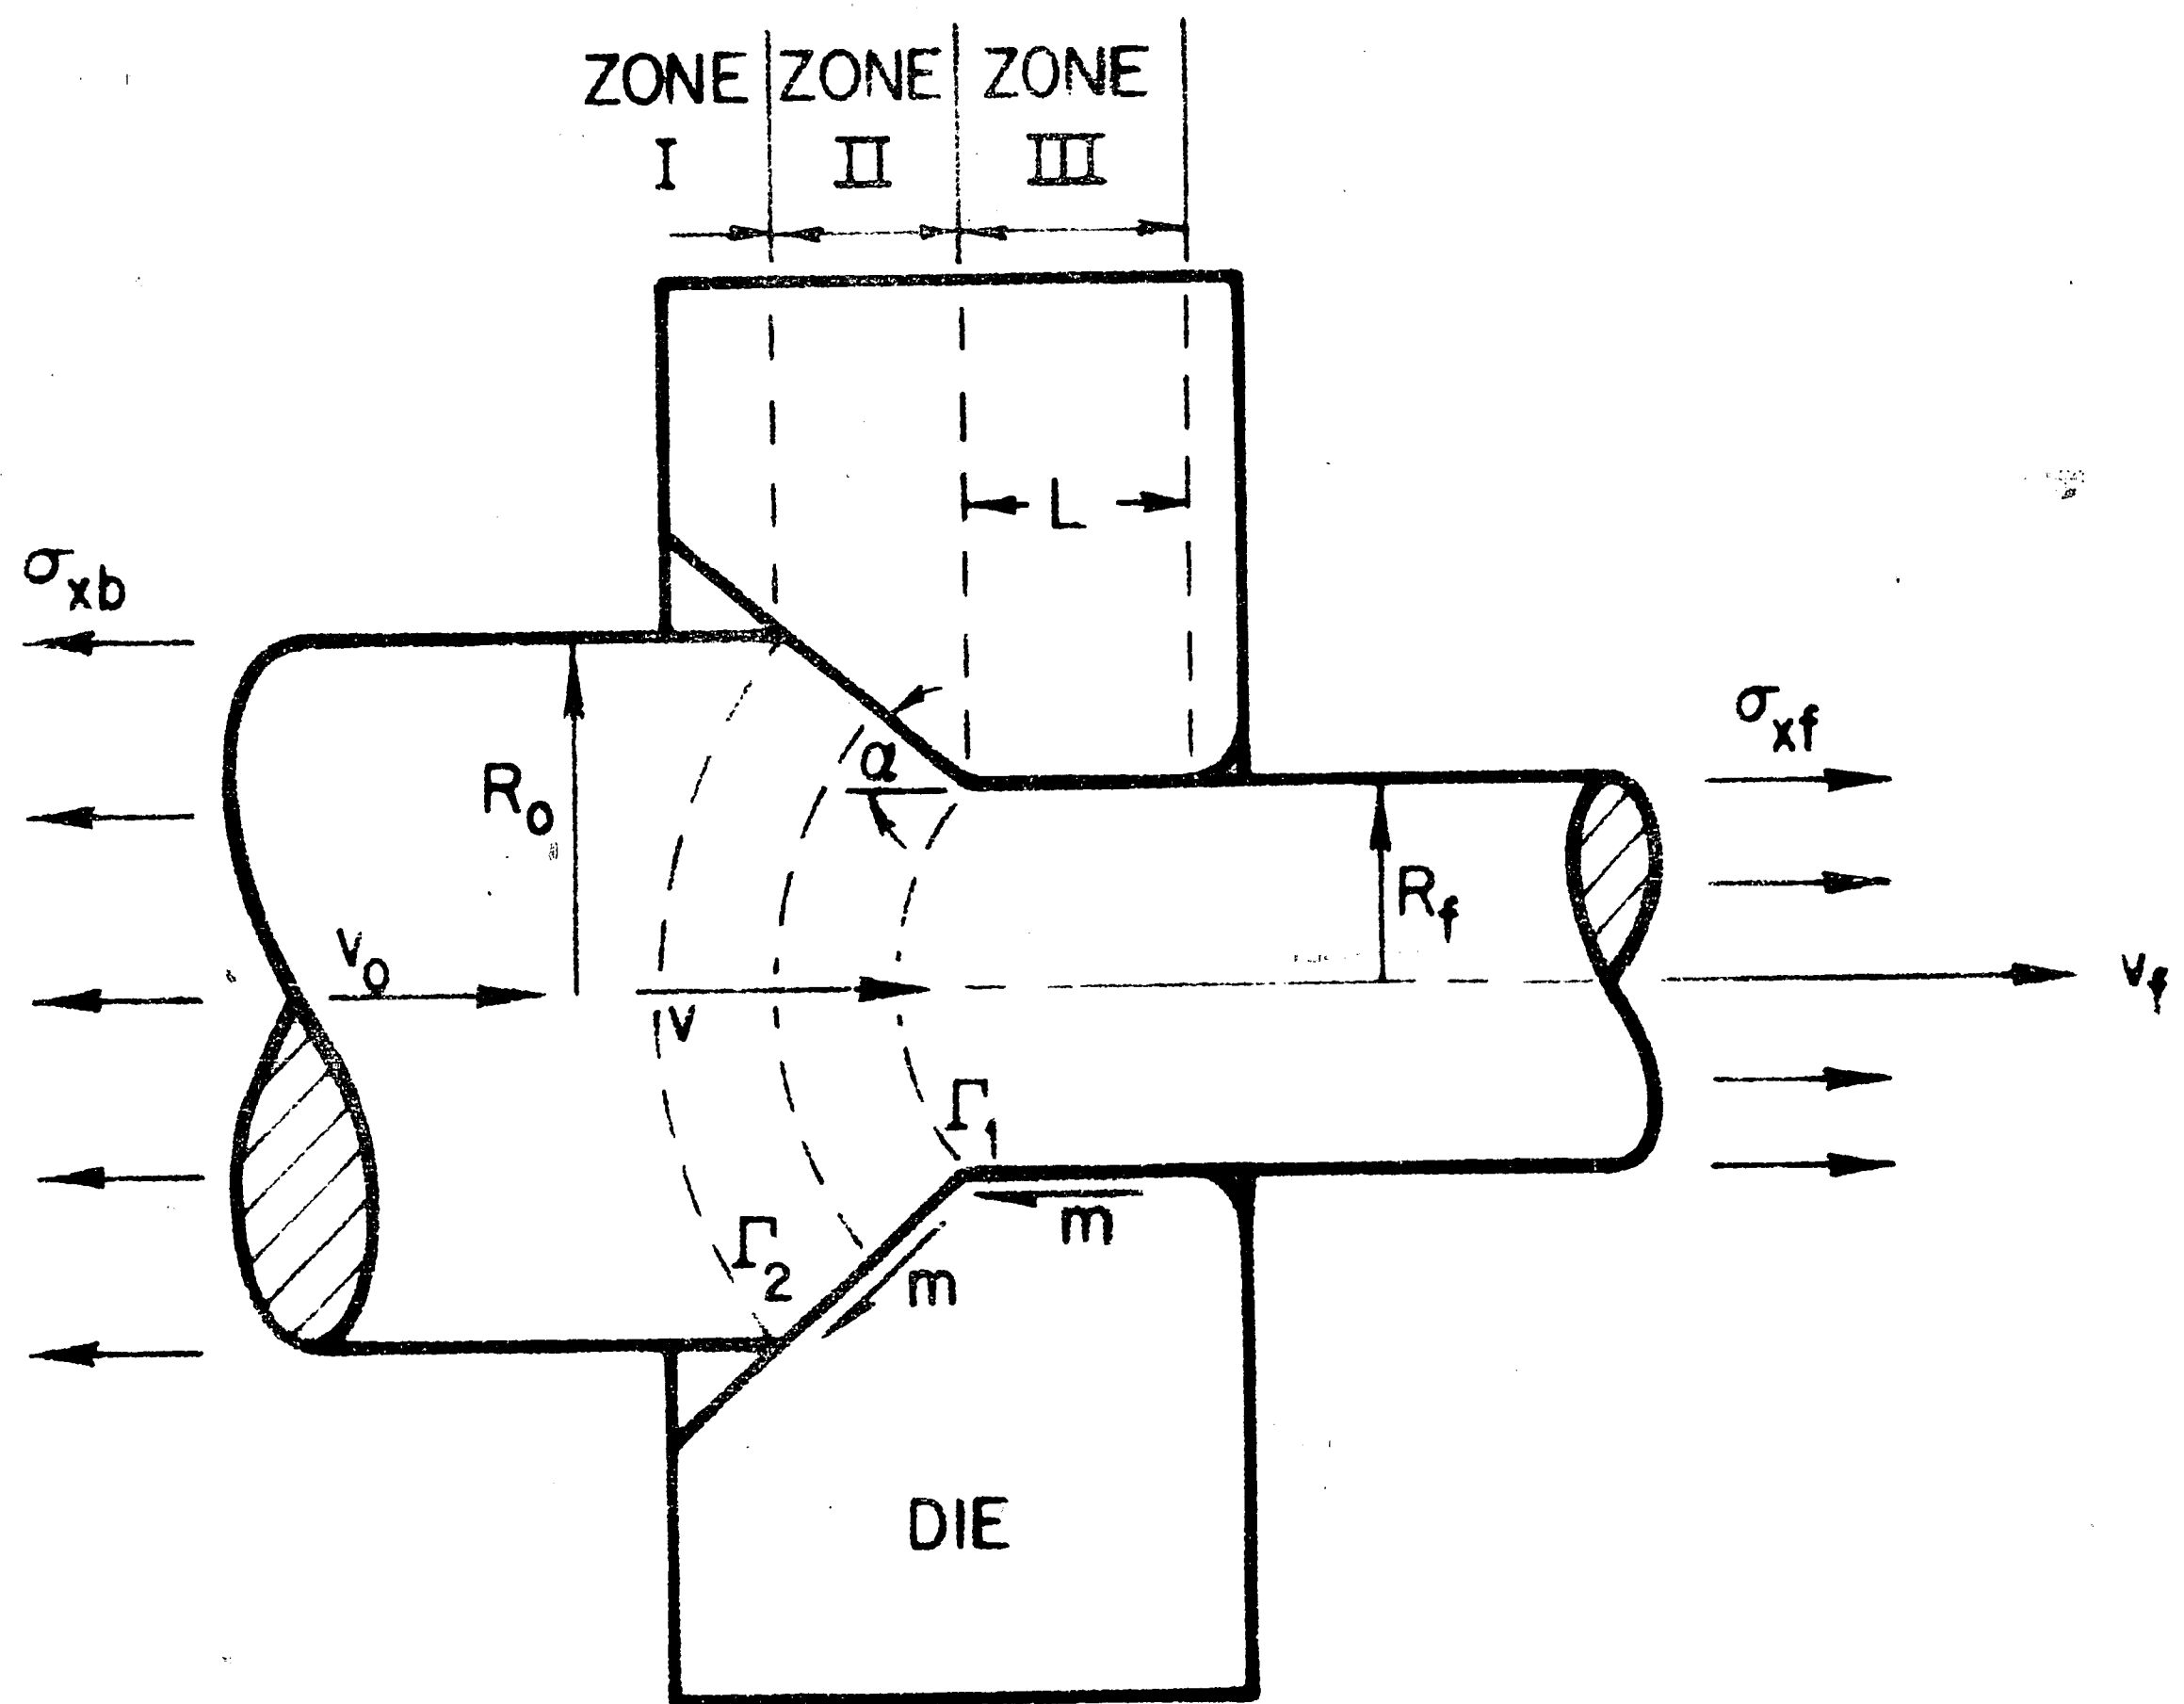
THE DIE AND WIRE IN WIRE DRAWING AND EXTRUSION.
